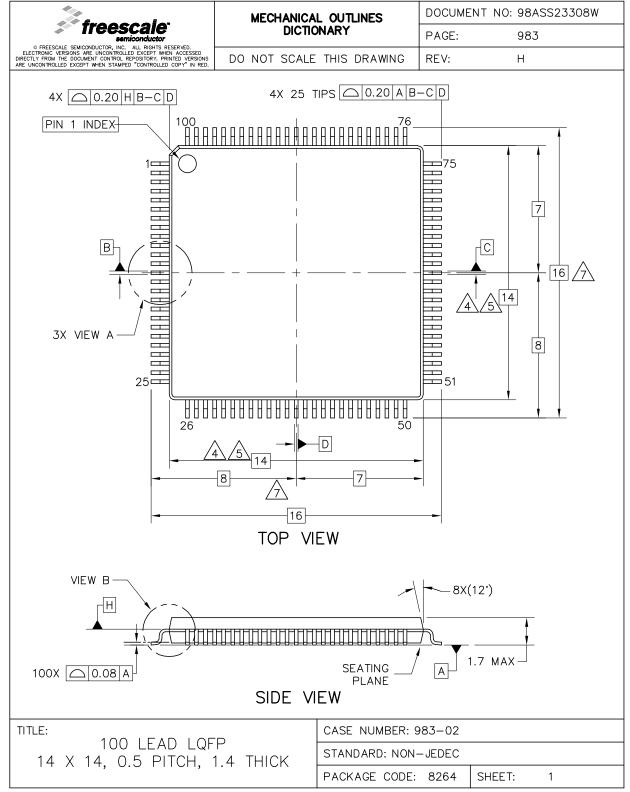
100 LQFP package mechanical drawing (1 of 3)
